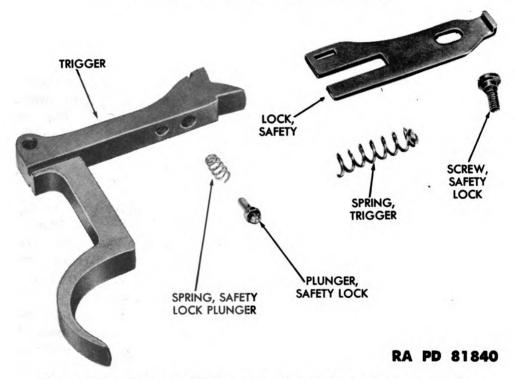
Sear and Trigger and Safety Lock Groups of Winchester Rifle, Cal. .22, Model 75 — Exploded View
